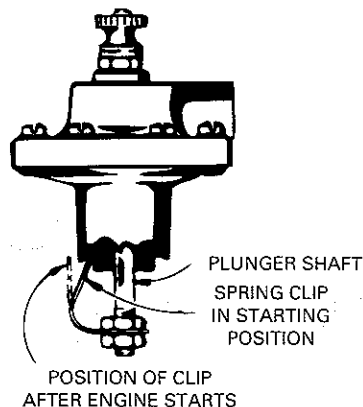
YC48 Low oil pressure switch for engines with magneto ignition
